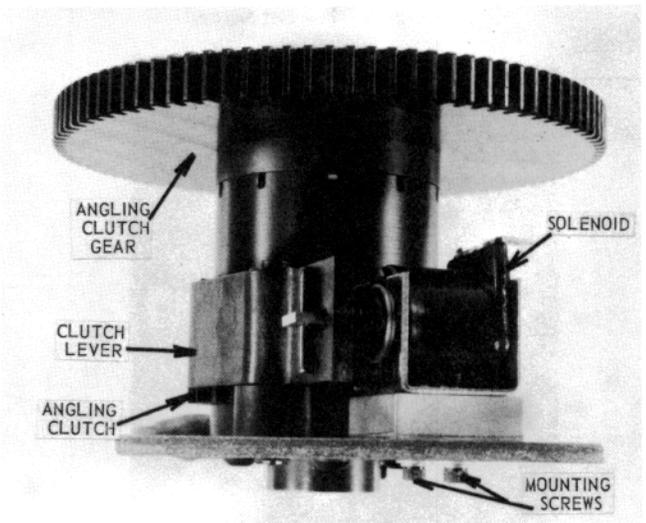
Angling Clutch, Angling Clutch Gear and Angling Clutch Solenoid
